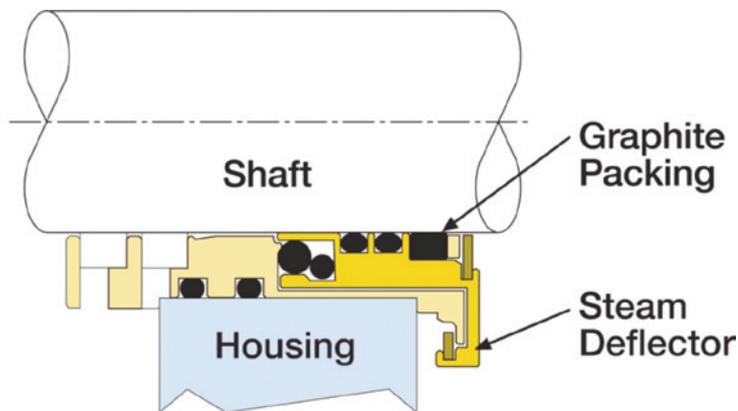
Modern rotating labyrinth bearing protector design for a steam turbine (courtesy of AESSEAL, Inc).
